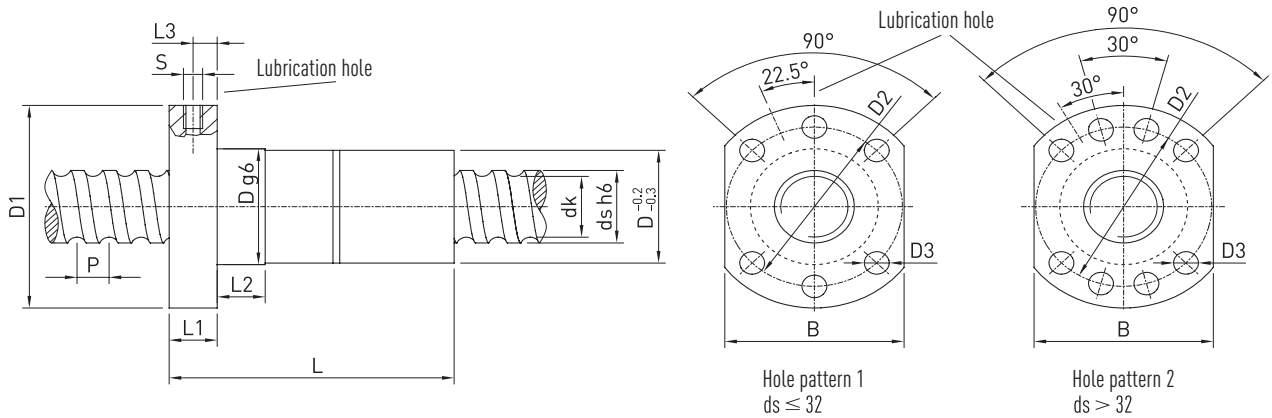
DDB double flanged nuts with NW and SP seals
